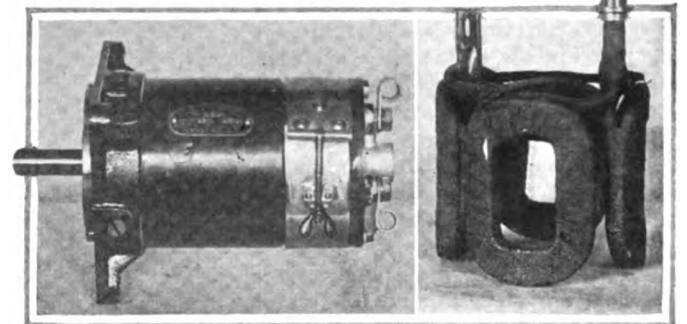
Left—Bijur starting motor with squared shaft for sliding pinion. Right—Assembly of starting motor field coils
